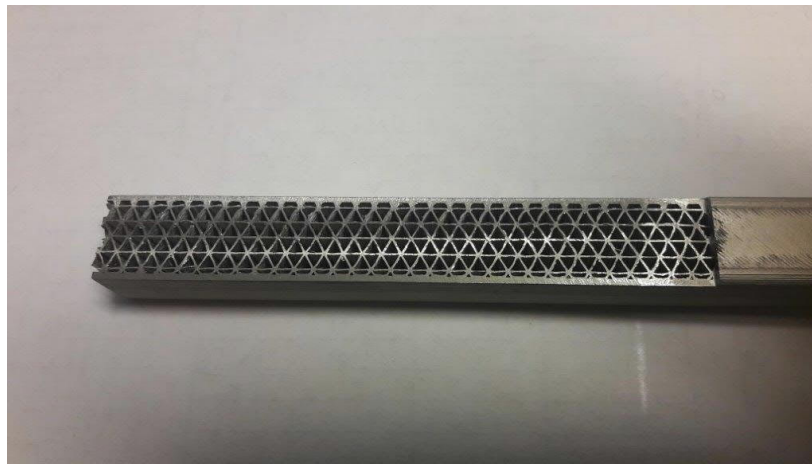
Printed & machined sample to demonstrate the sintered infill.
